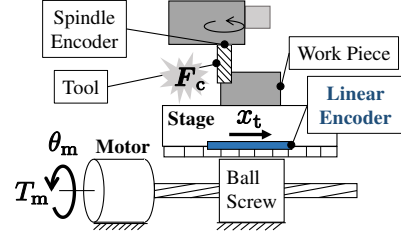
NC machining table (ball-screw-driven) with a linear encoder.
